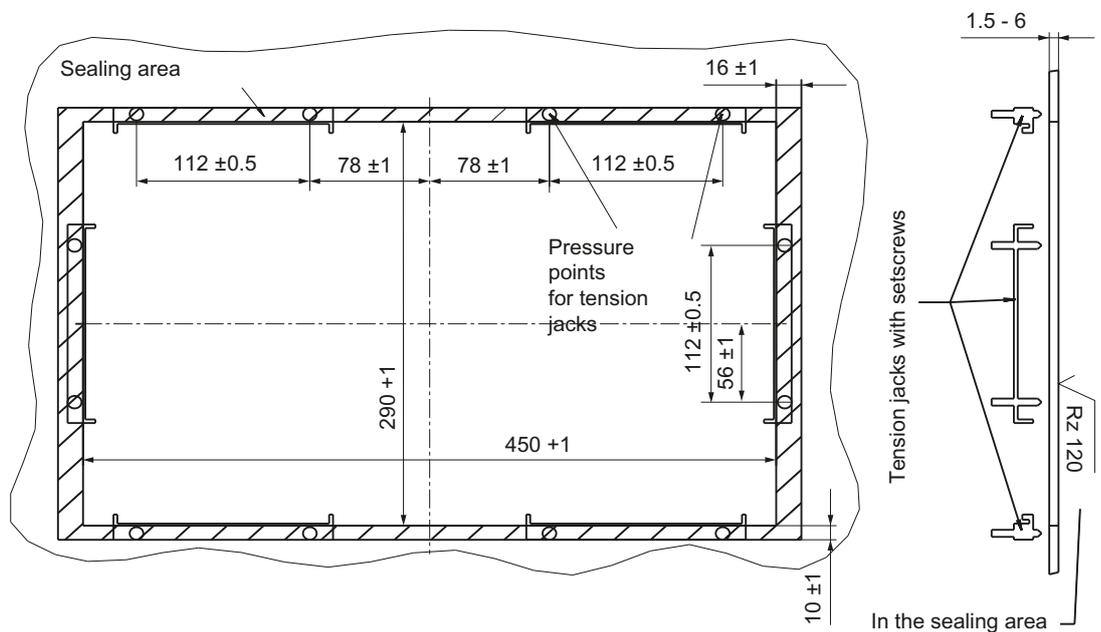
Dimension sheet for installing the OP 010C operator panel front
